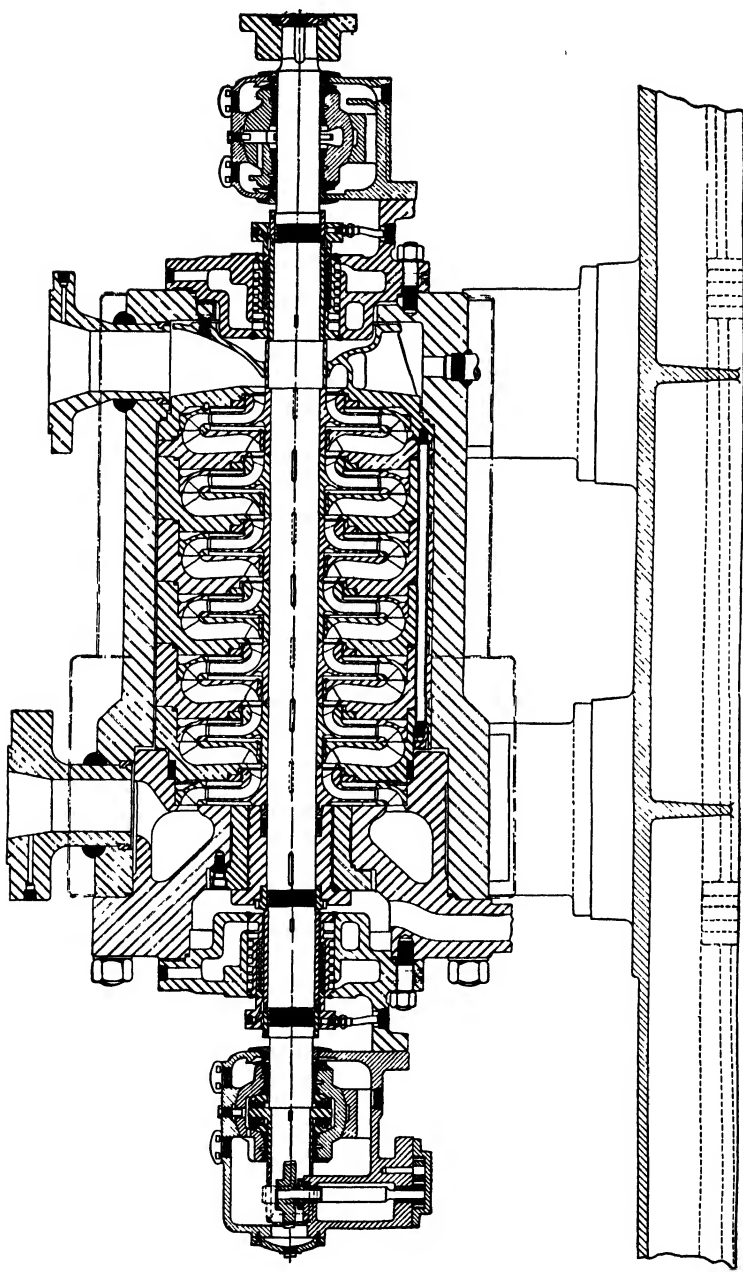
Ingersoll-Rand boiler feed pump.
